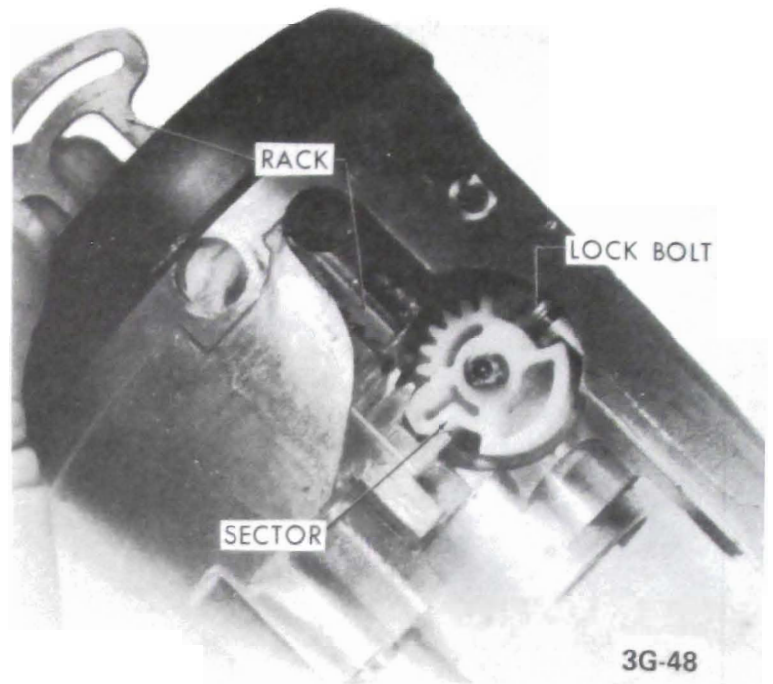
G-48 - Engaging Block Tooth on Rack to Sector
